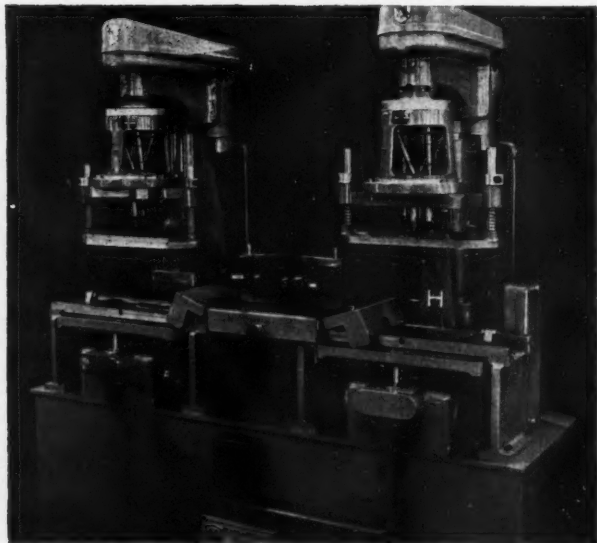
Two S.P.K. machines are here shown mounted on a cabinet base and set up for drilling and tapping holes in a cylinder head for an air compressor. The right-hand machine has been modified to provide leadscrew control for tapping operations
